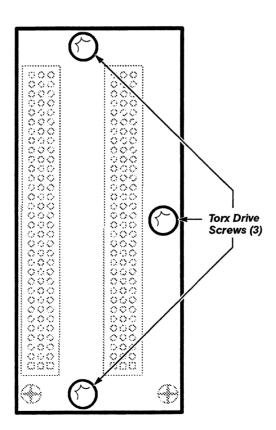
Removing/Replacing the A21 Mini Mother Board
